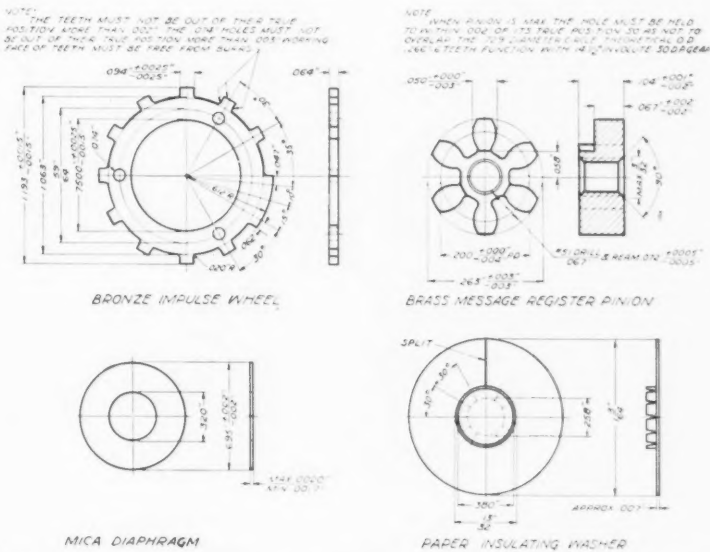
Sketches of typical piece parts requiring accurately built punches and dies
